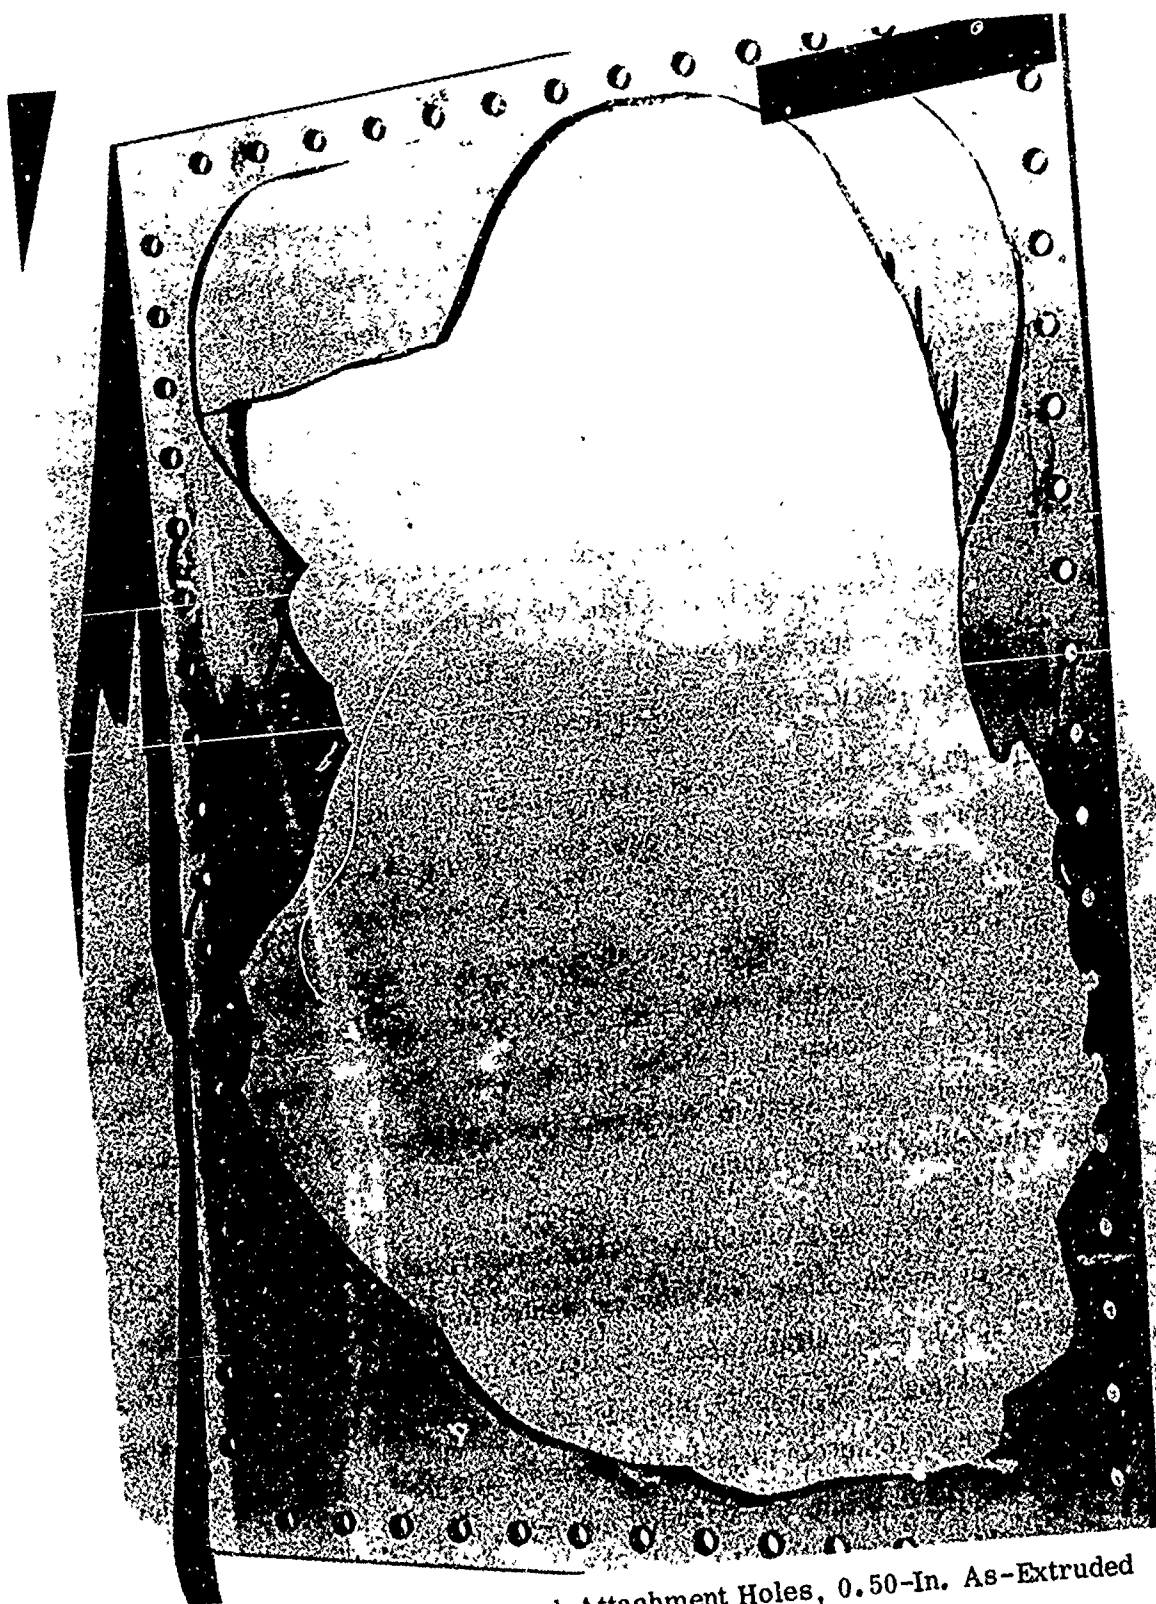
Failure Through Attachment Holes, 0.50-In. As-Extruded Polycarbonate at 45-Deg Impact Angle
